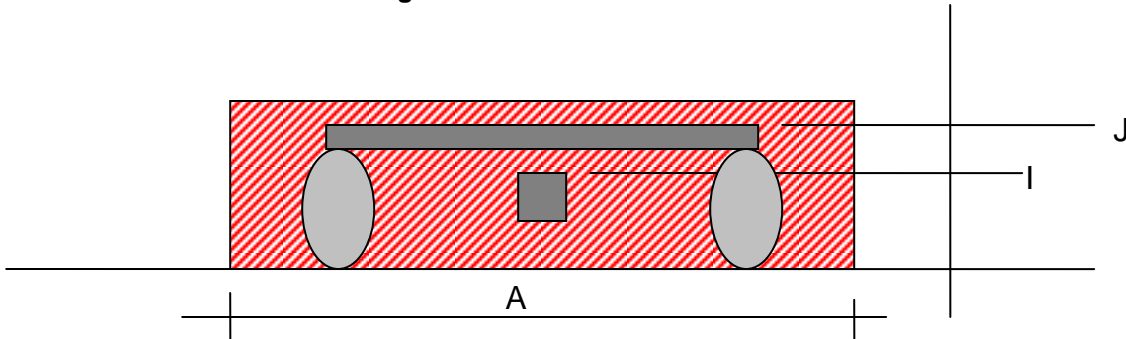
Dimensions for clearing Wire Strikes with Swivel Wheel Structure on V602 & V650
